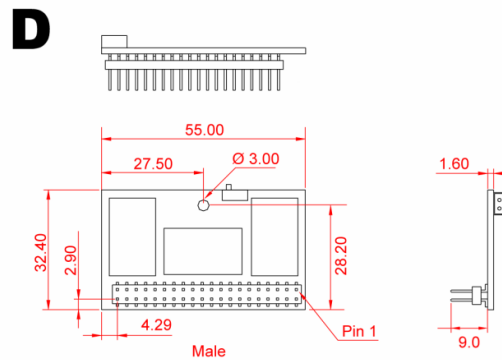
Mechanical Dimension of EDC4000 40-pin(Horizontal Female/Male Type E)
